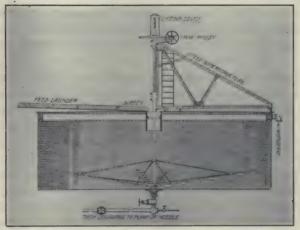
Dorr Thickener Mechanism Installed in Steel Tank
